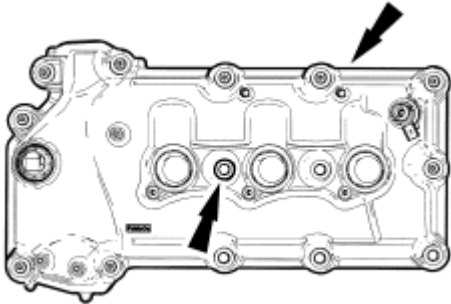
Locating RH Coil-On-Plug Assemblies And Bolts
